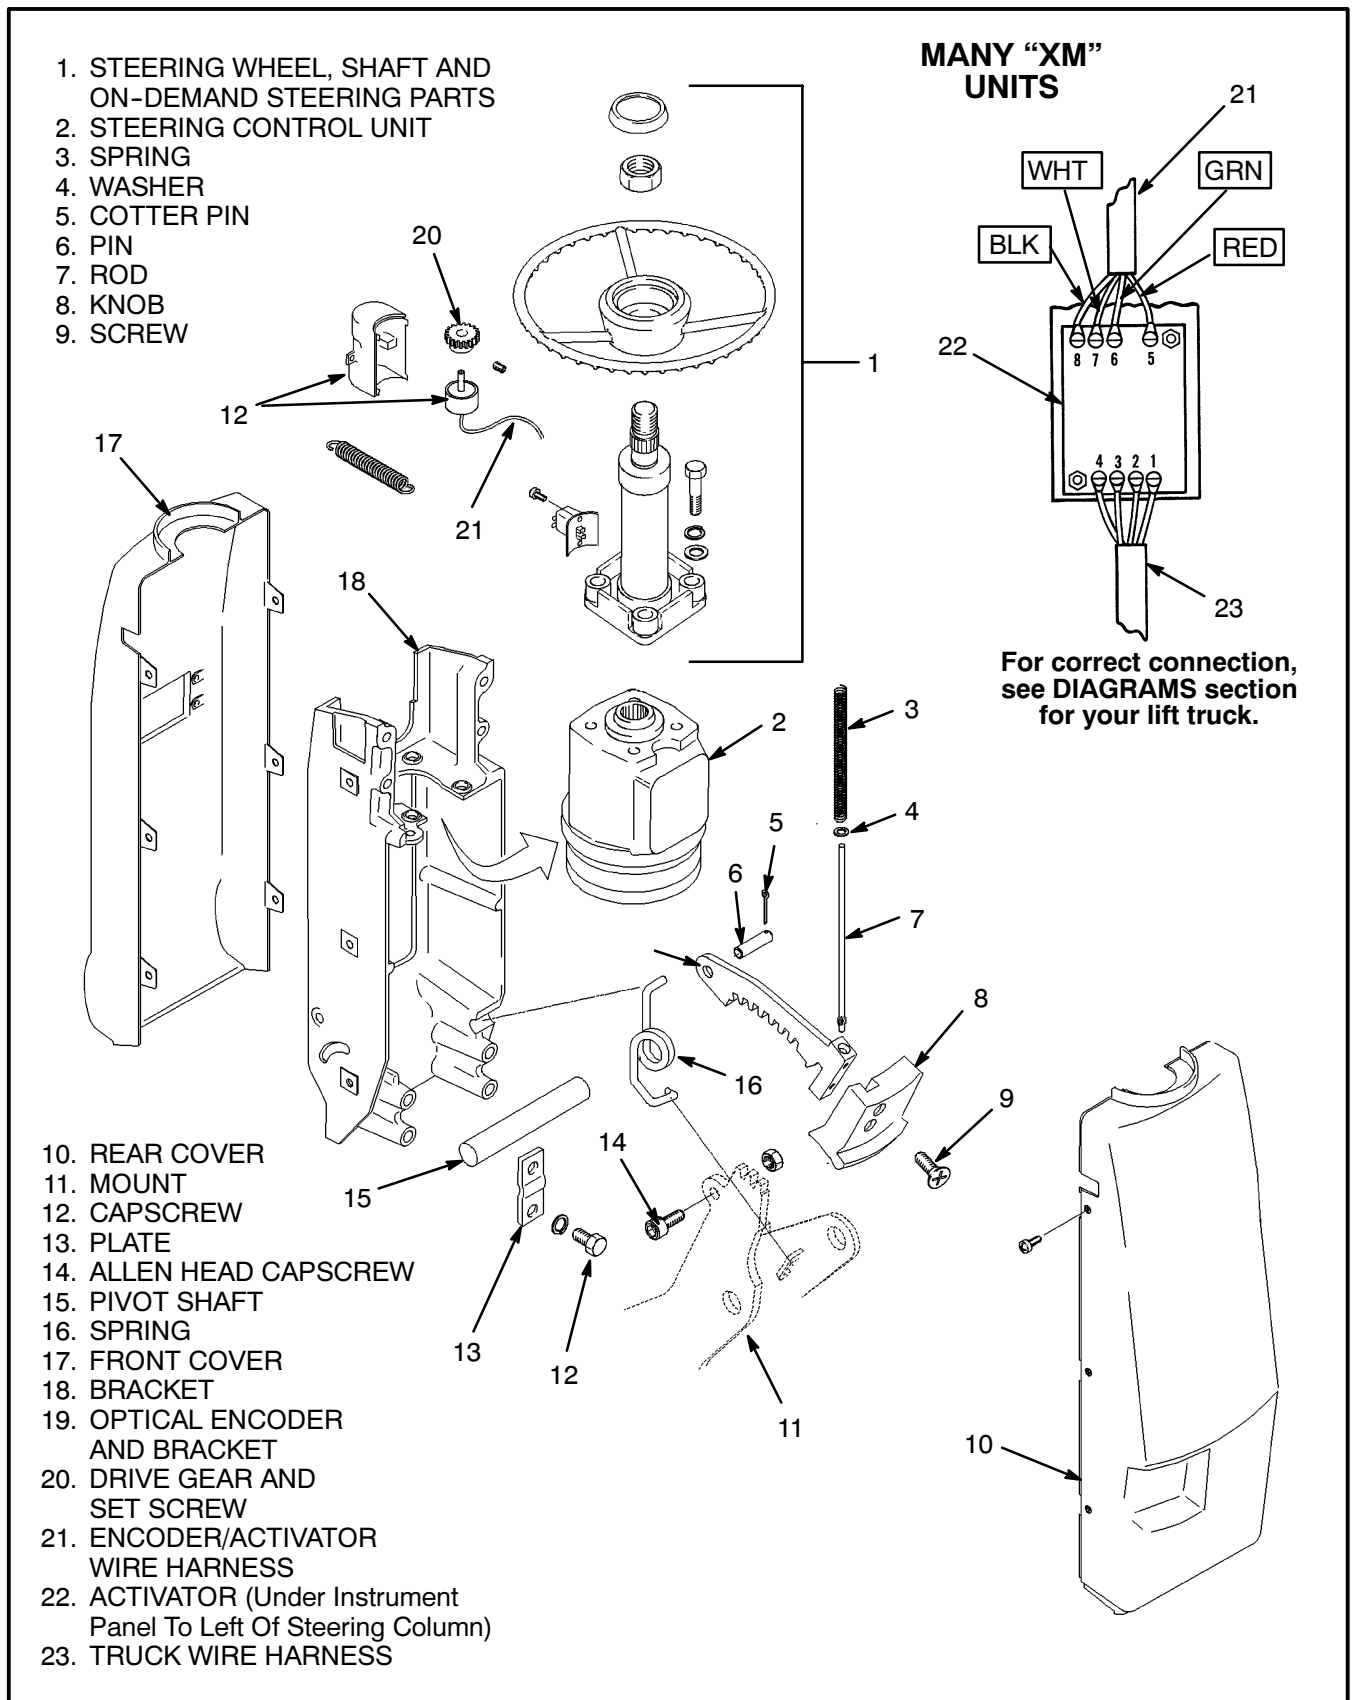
STEERING WHEEL AND STEERING COLUMN ASSEMBLY (3 of 3)
